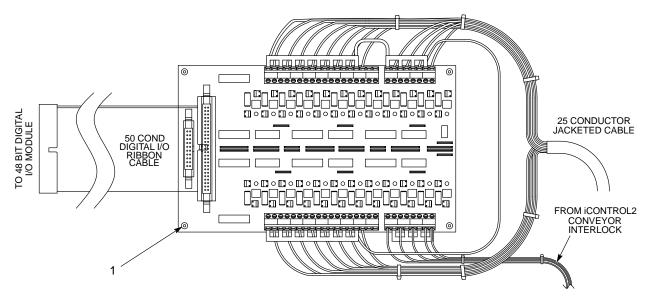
Old Interface Card with Wiring and Ribbon Cable Connections
